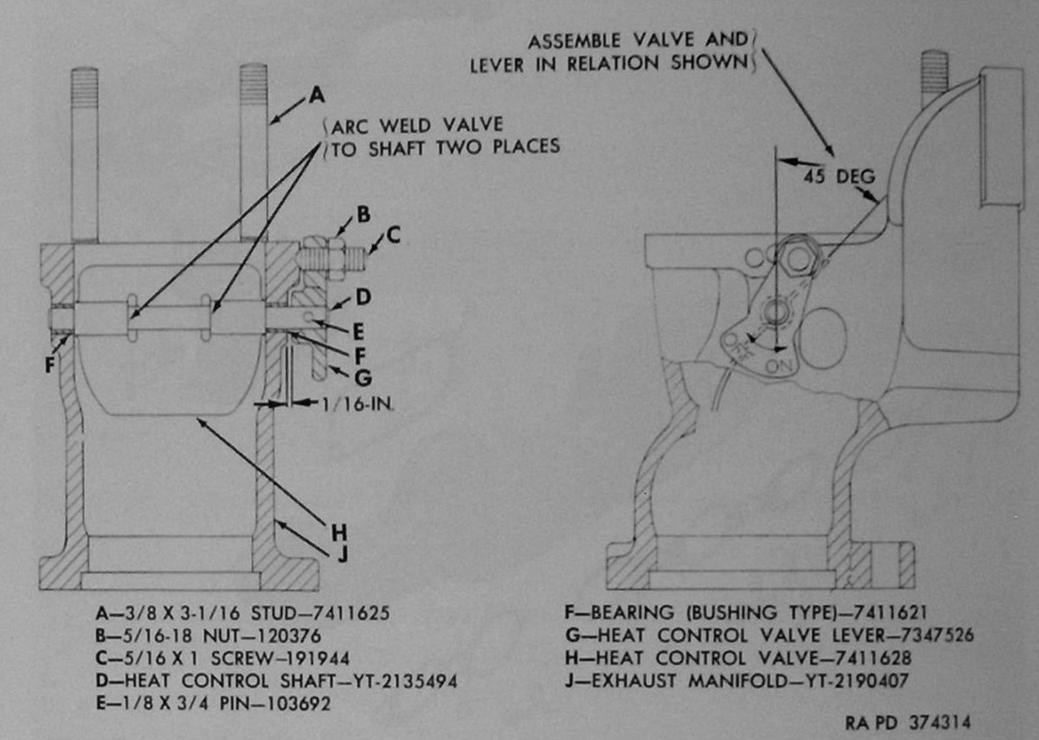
Sectional view of exhaust manifold heat control valve—engine assemblies 7411599 and 8329440.
